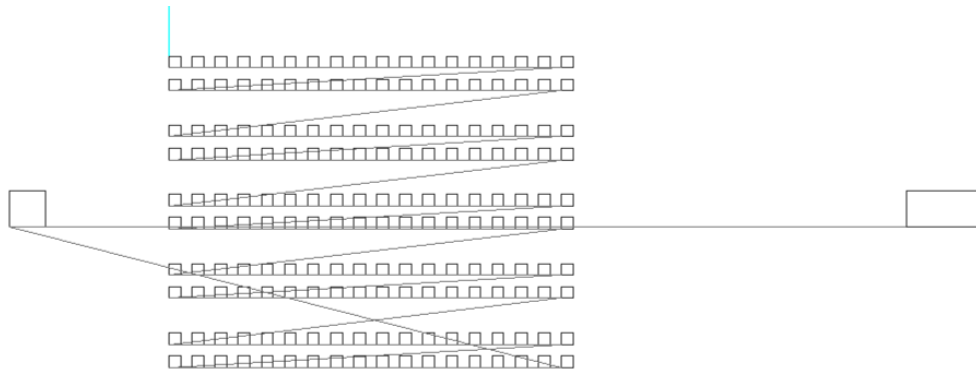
Automated pathway preview of the mill's cutting tool for the full scale middle thermoelement template
